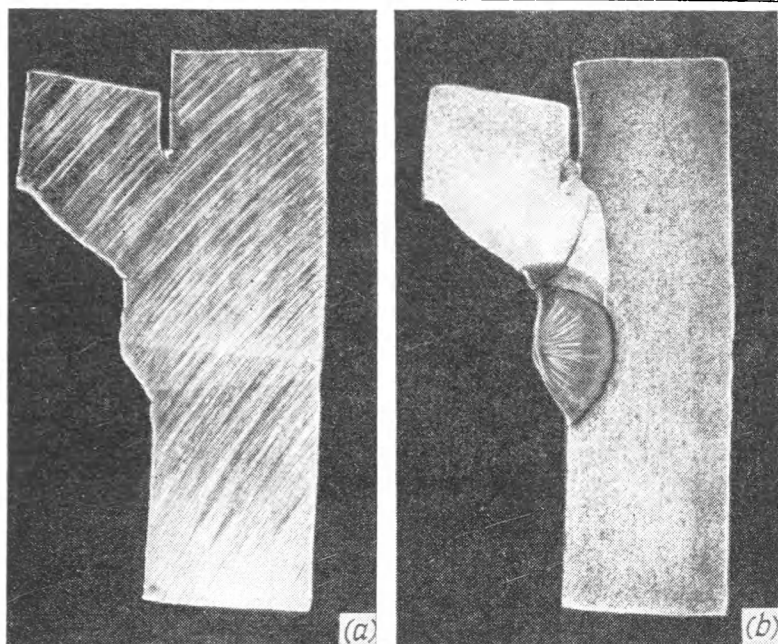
Macrosection of a weld seam (full scale)
